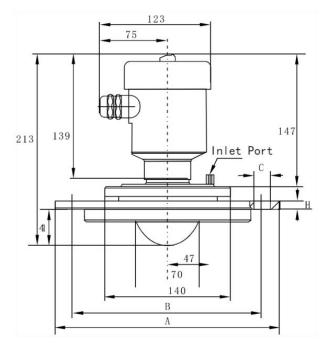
Dimensional Drawing of High-Temperature Threaded Connection Structure (Unit: mm)
